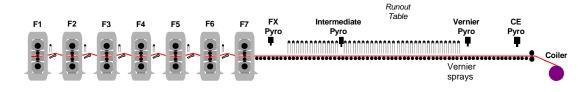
Hot Strip Mill equipment layout and coiling temperature control pyrometers
